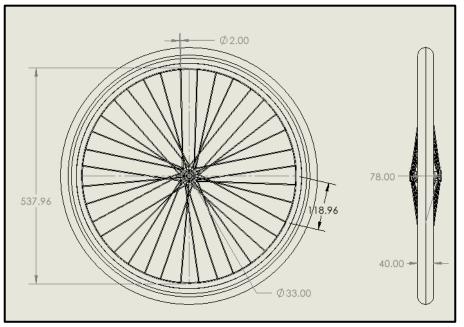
Wheel hub and tire technical drawing. All dimensions in mm.
